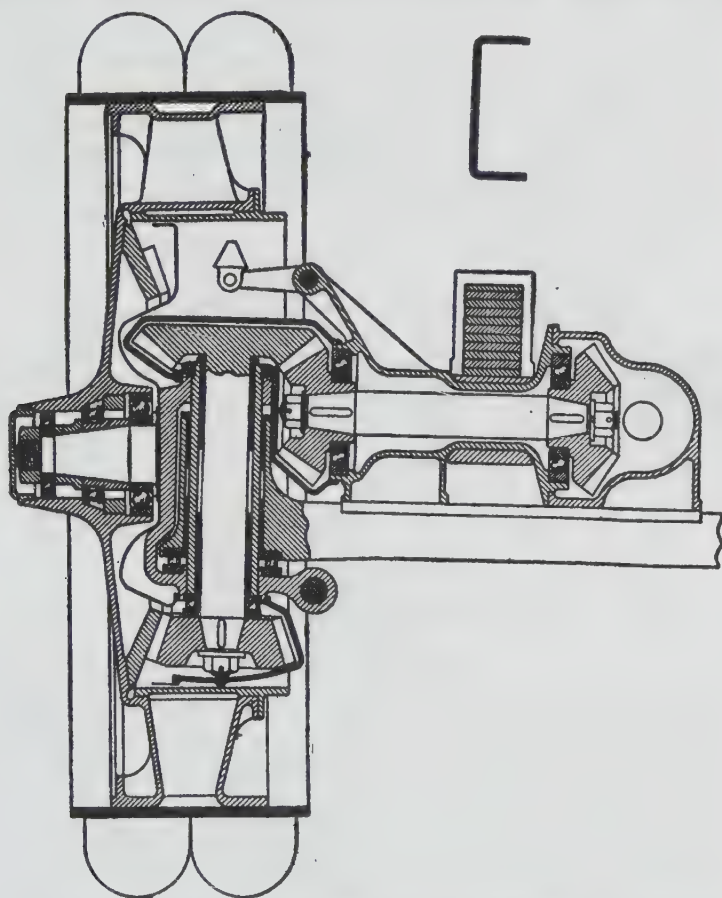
PANHARD BEVEL GEAR DRIVEN STEERING WHEEL.
